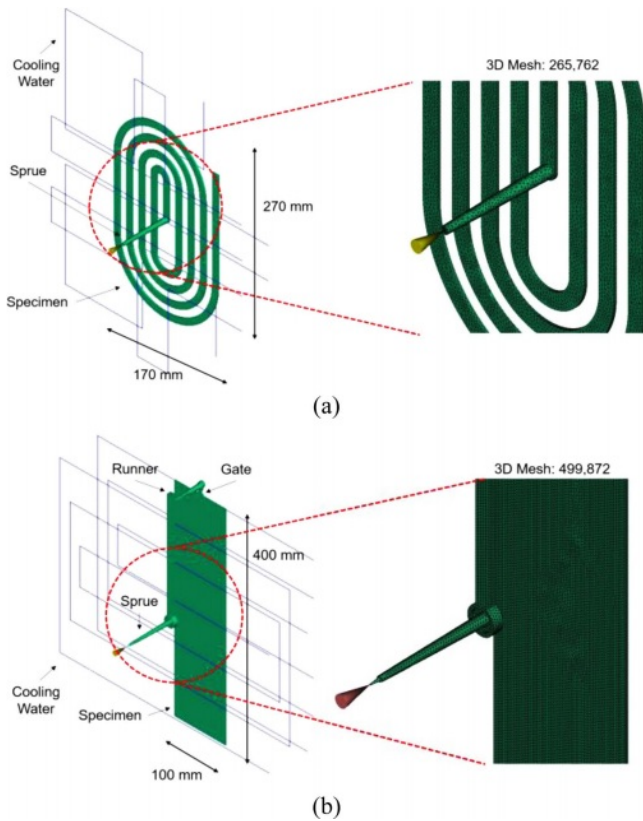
Schematic geometries of (a) spiral mold; (b) flat mold with 3-dimensional mesh configurations. 3D elements for spiral and flat molds are 265,762 and 499,872 respectively.
